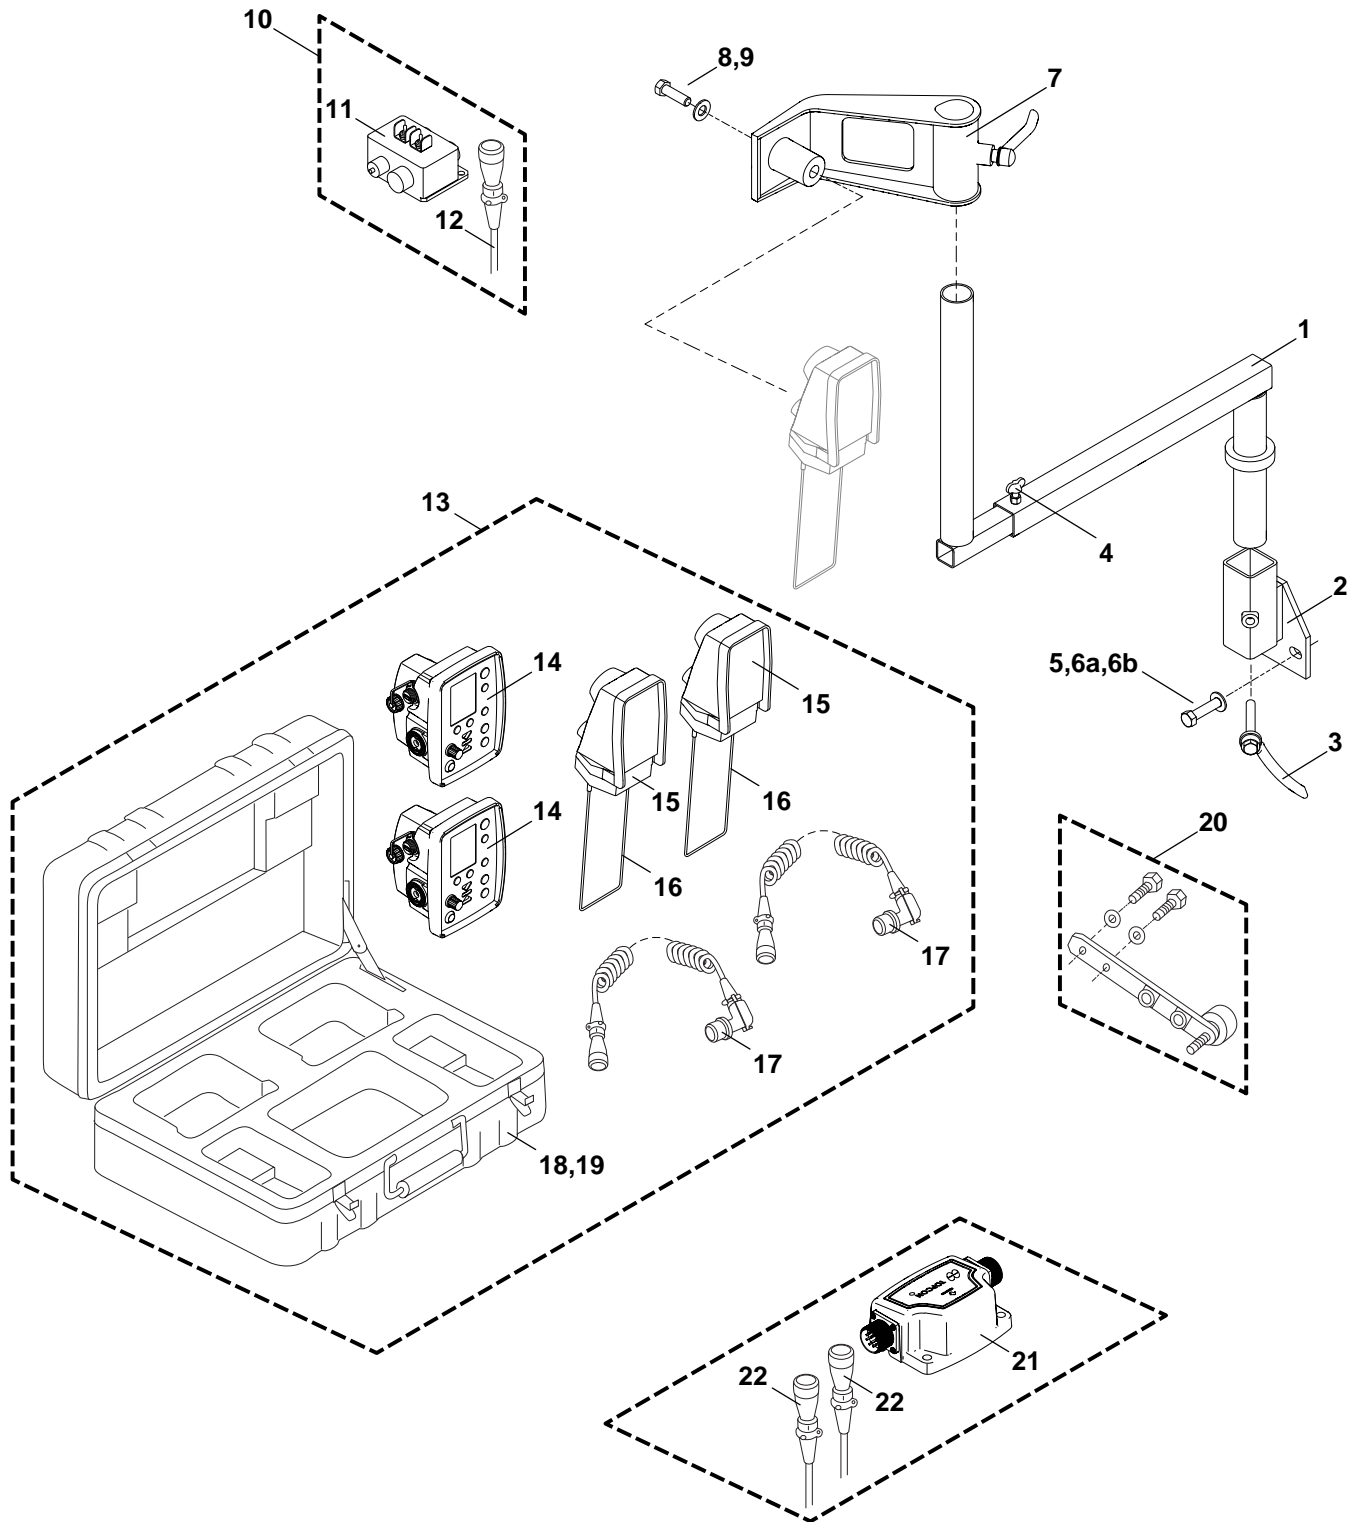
Option - TopCon P-32 Control Assembly (2 of 2)
